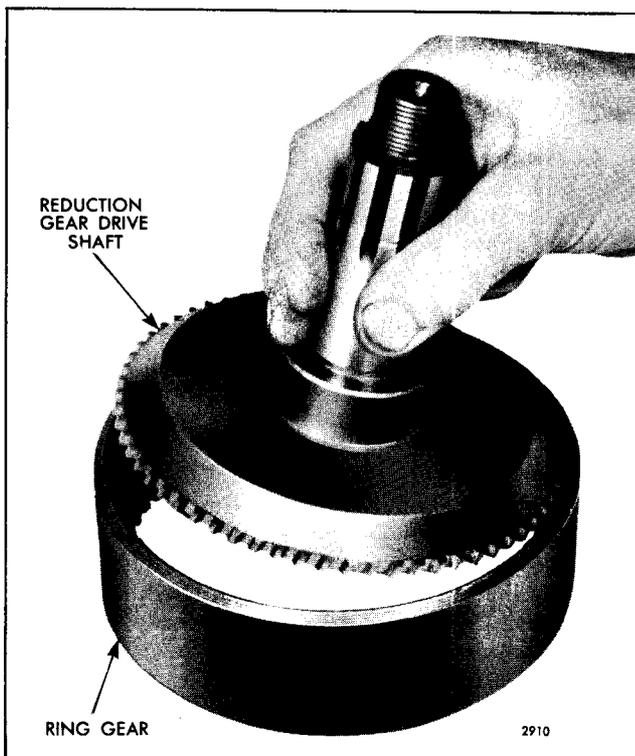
Installing Reduction Gear Drive Shaft in Ring Gear (2.1:1 Ratio)
